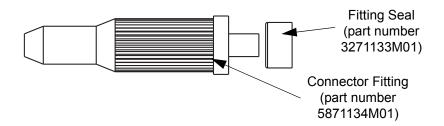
Connector Fitting - Fitting Seal Pump Connector
